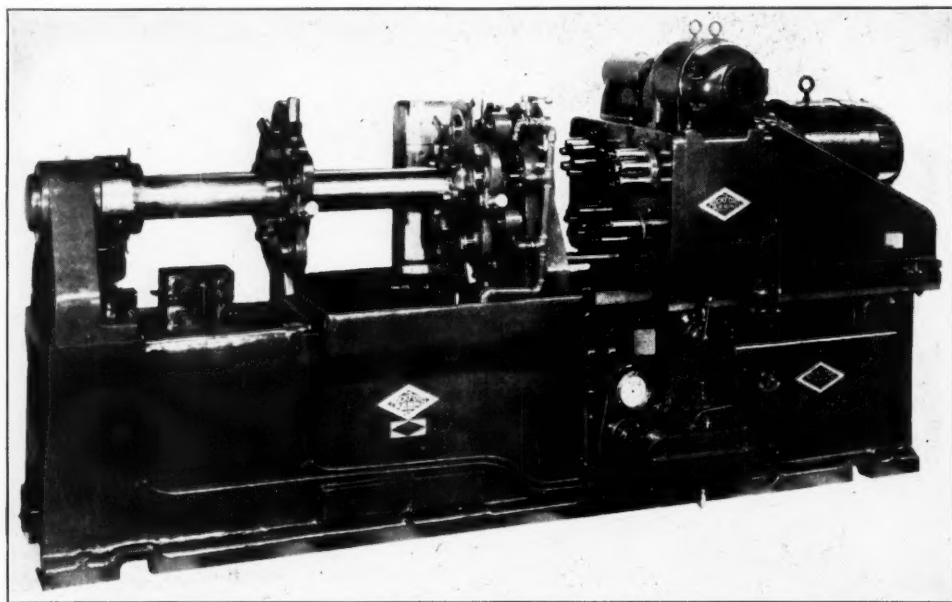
An hydraulic horizontal drilling machine of Rockford design. Flow of cutting fluid in this machine is automatic with the cutting movements of the tools.
